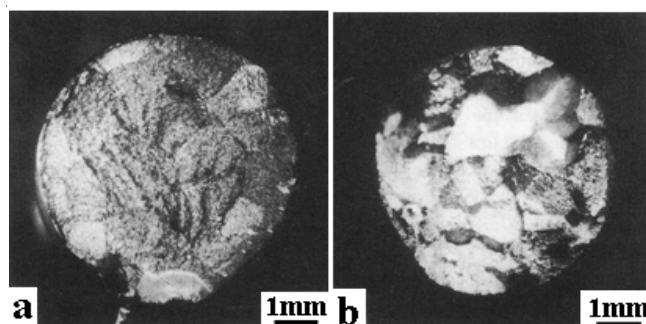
Fracture surface appearance of Super α_2 tensile-tested in vacuum at (a) 673 K, mostly transgranular and (b) 973 K, intergranular
